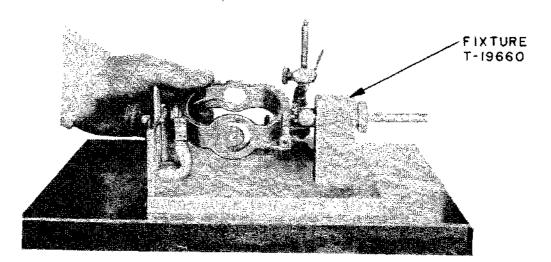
CHECKING THE CONCENTRICITY OF THE AIR PIVOT IN THE GIMBAL RING TOLERANCE, .0006 INCH.
